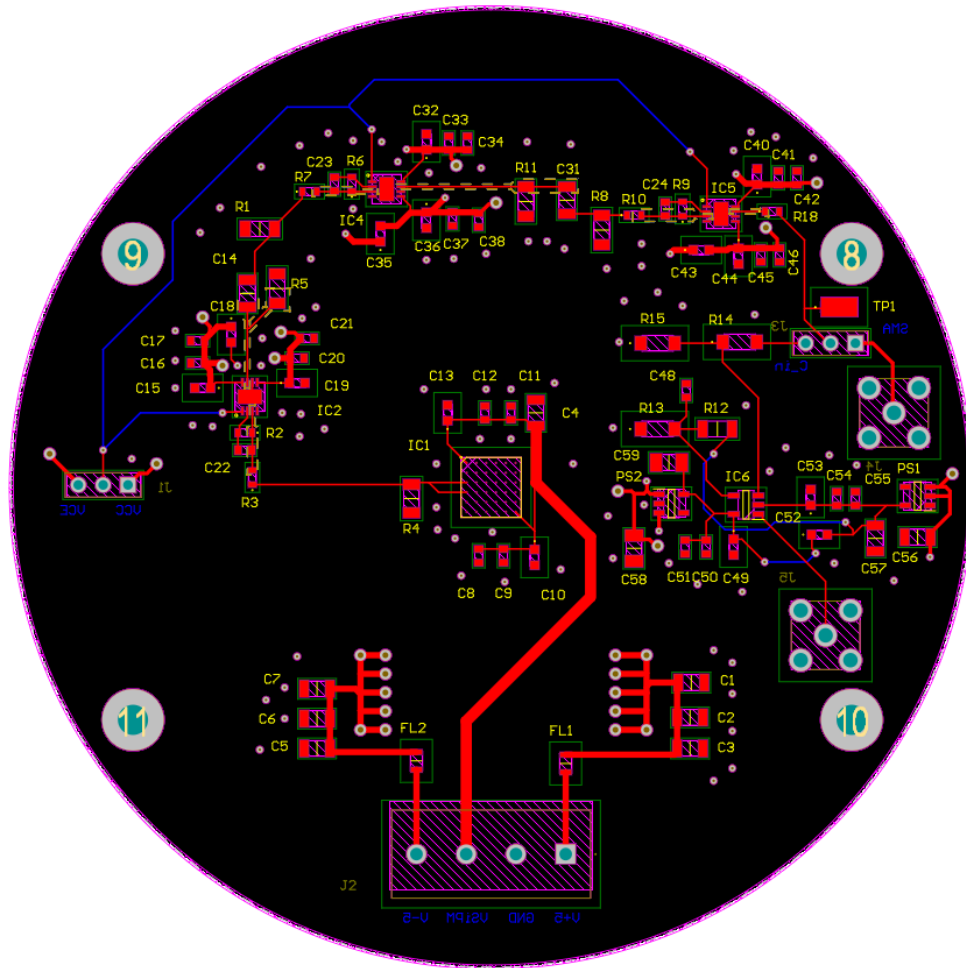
Picture of the final PCB layout without the mass and power planes
